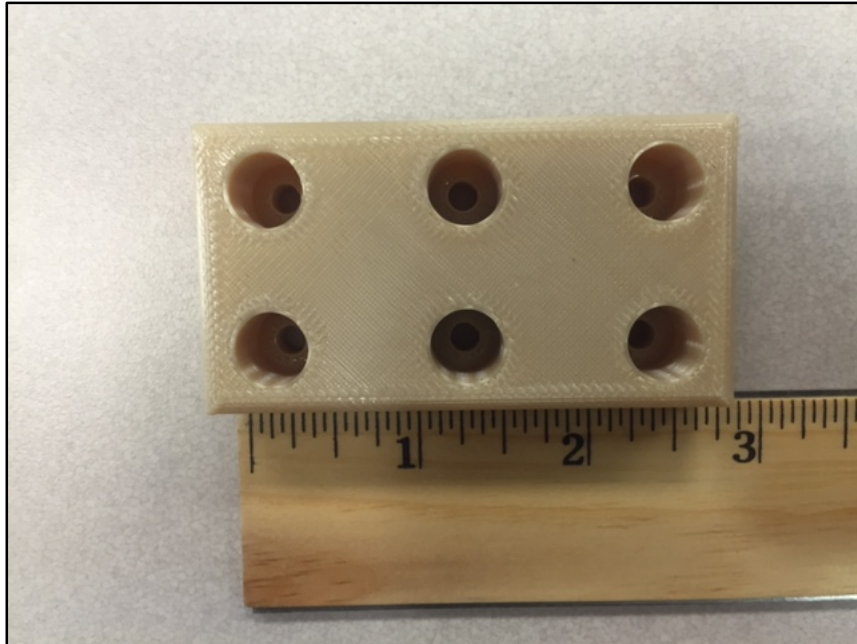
Top view, 3D Printed C-130J Aft Cargo Door Rub Strip
